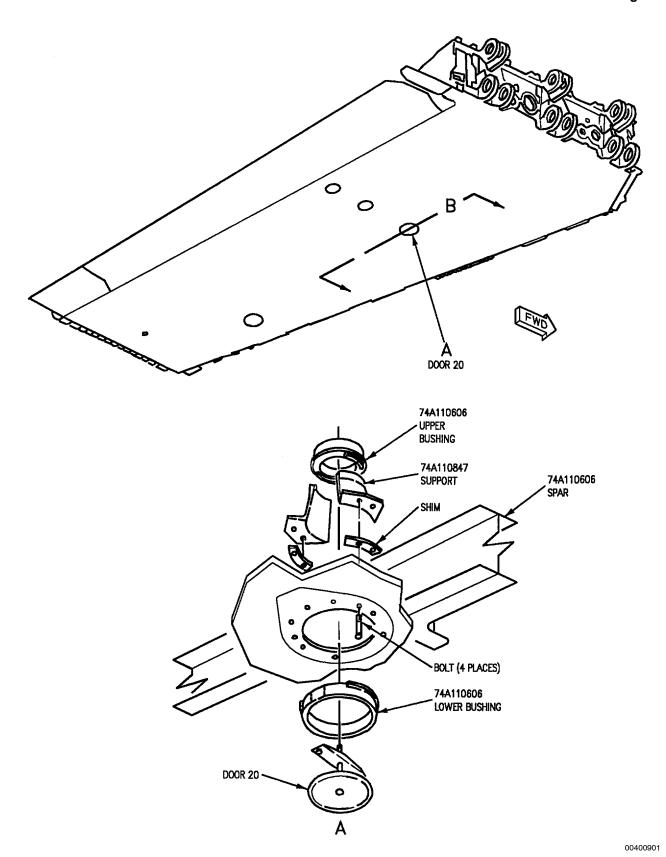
Inboard Pylon Lower Bushing Alignment (Sheet 1)
